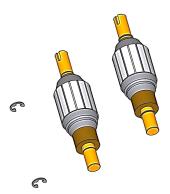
E-type circlip (left) and motor rotor parts (middle), motor rotor after pressing the circlip(right)
